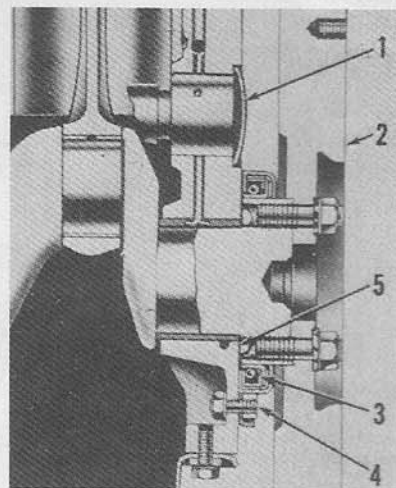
Models TE20, TO20, and TO30 engine crankshaft rear oil seal of treated leather. To renew oil seal, separate engine from transmission and remove flywheel and oil pan.
